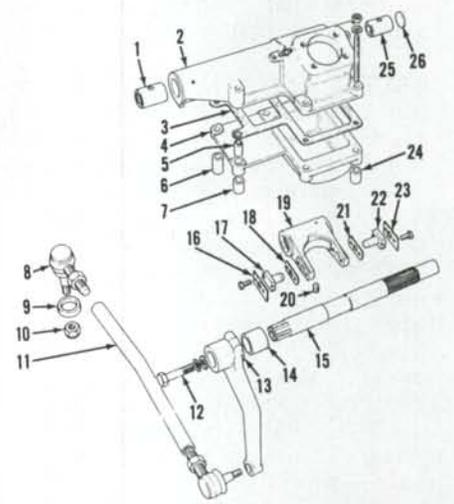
Exploded view of steering box and its related parts used on 1190 models with manual steering.
